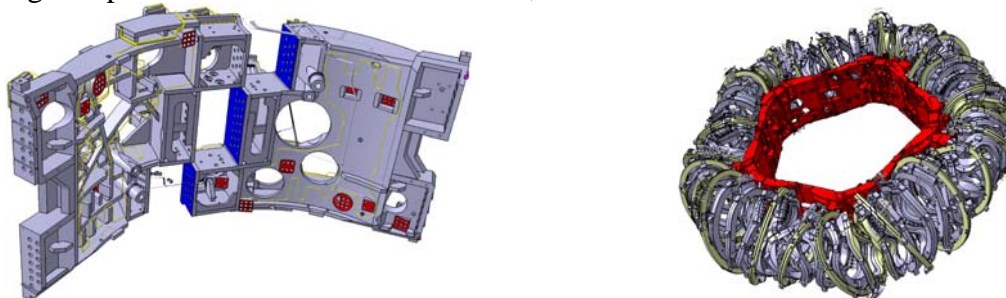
3 D view of half-module assembly and coil support structure of W7-X.
